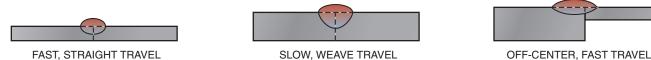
Controlling weld bead size by adjusting welding parameters.
